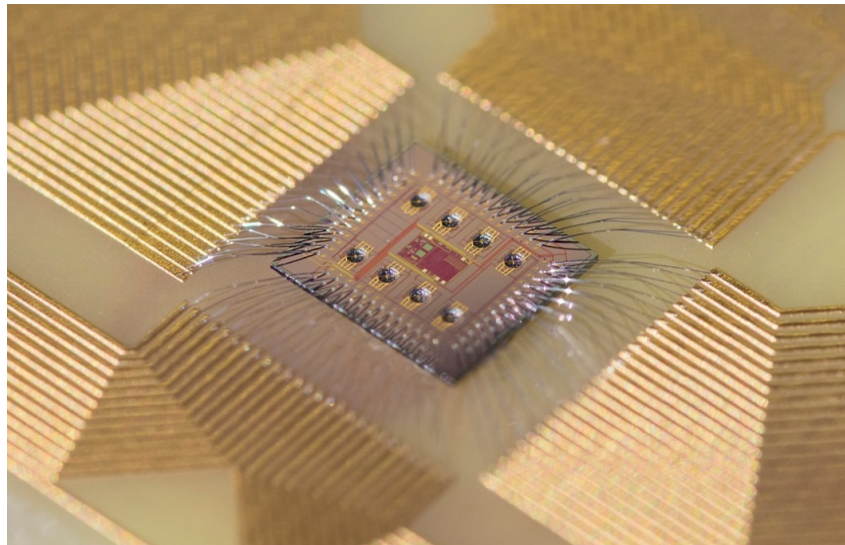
Picture of a fully processed MPW₄ gas sensor chip (8 micro hotplates) bonded on a PCB for evaluation.
